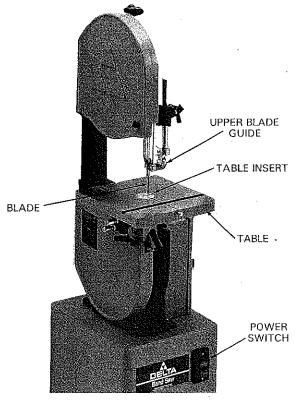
A 14-inch bandsaw. (Delta International Machinery Corp.)
